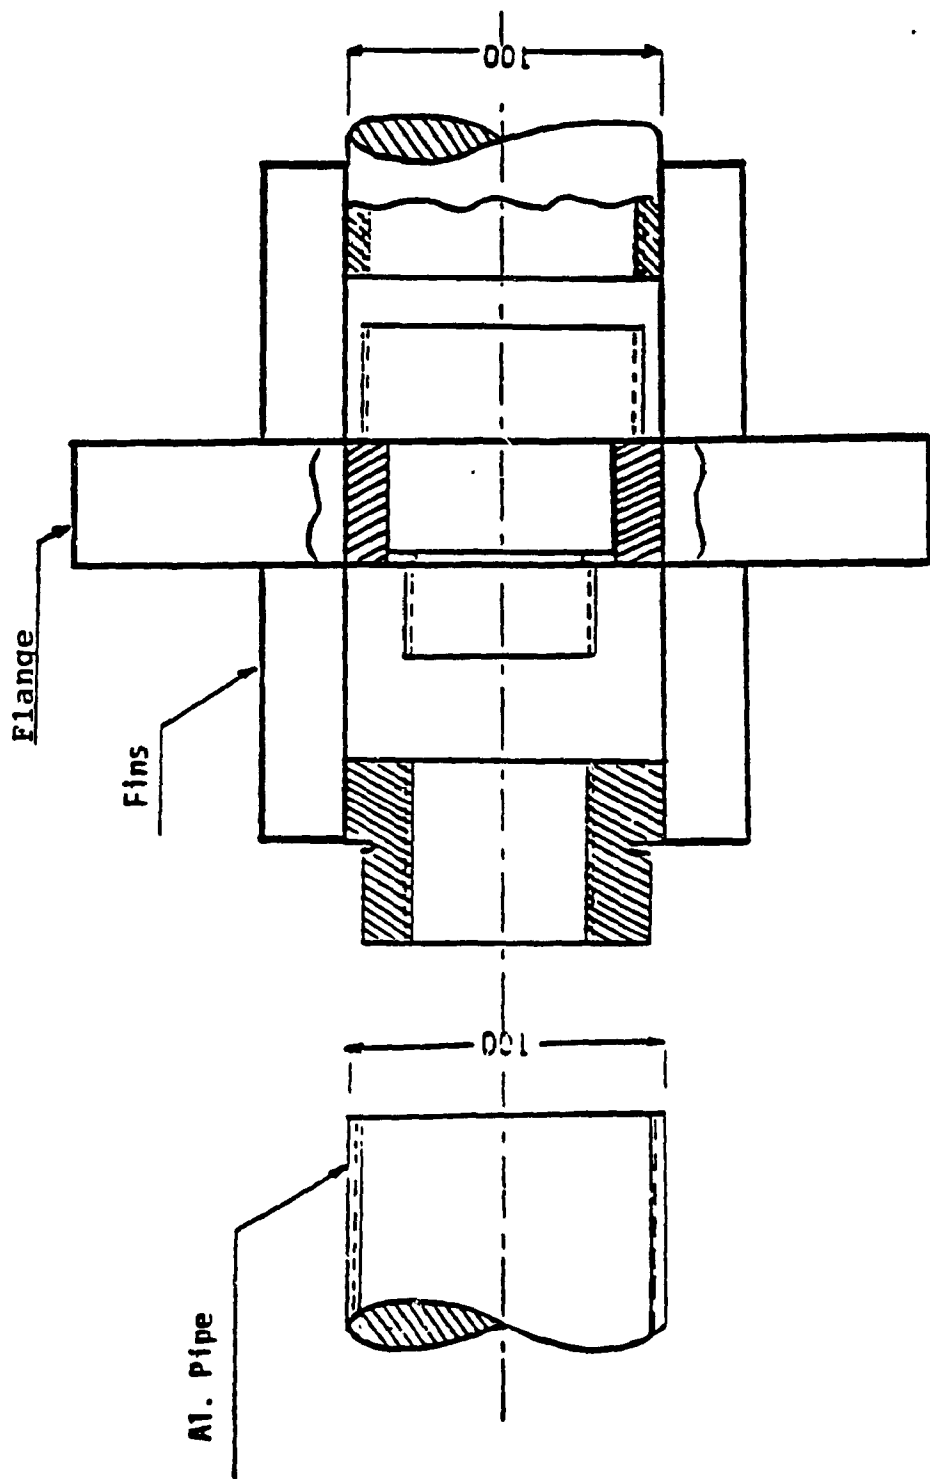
Sectional view of the Device Supporting the Inner Tube
